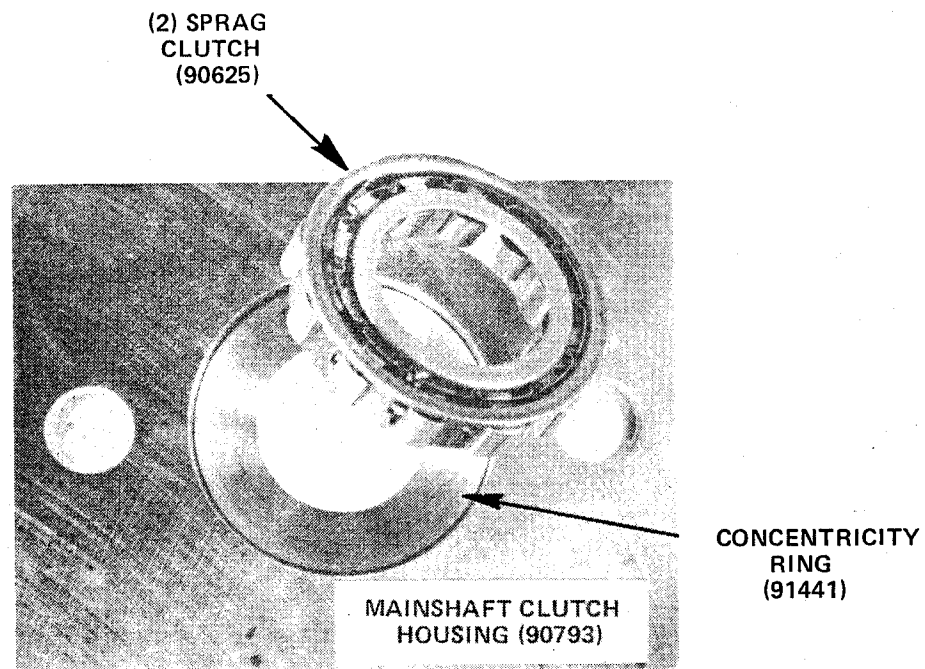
Mainshaft Clutch Housing with Concentricity Ring and Sprag Clutches used on Trap above serial No. 294.
